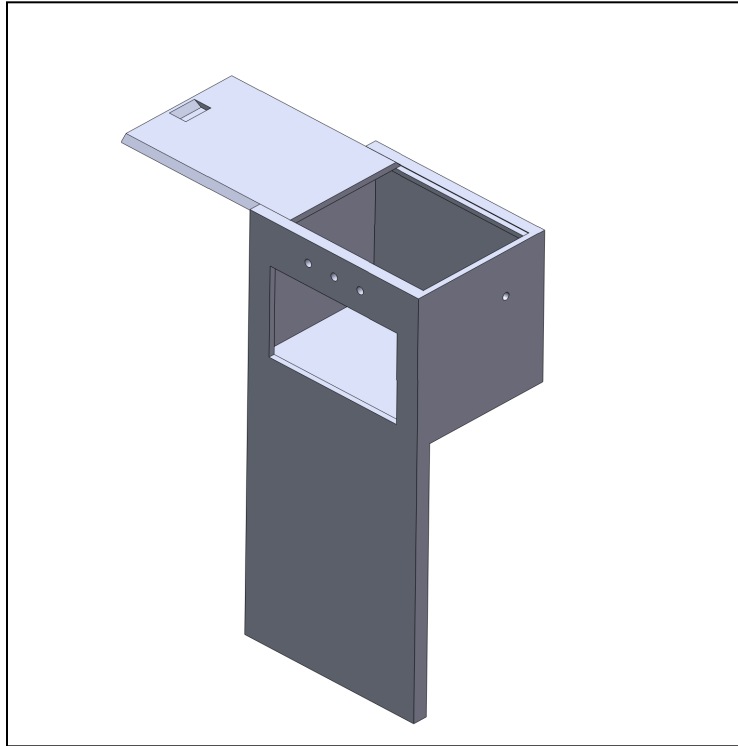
Isometric view of our housing CAD model (SOLIDWORKS). The lid has a notch for easy removal with one finger
